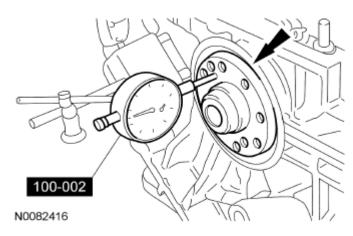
Measuring Crankshaft End Play Courtesy of FORD MOTOR CO.
